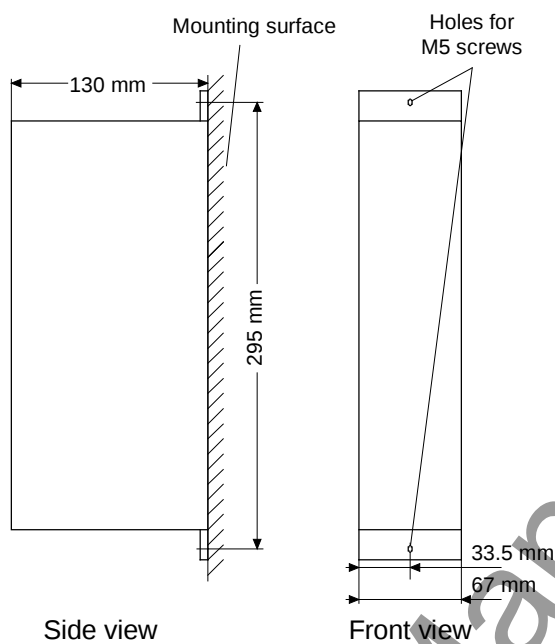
Dimension drawing of the 6 A EMC filter
